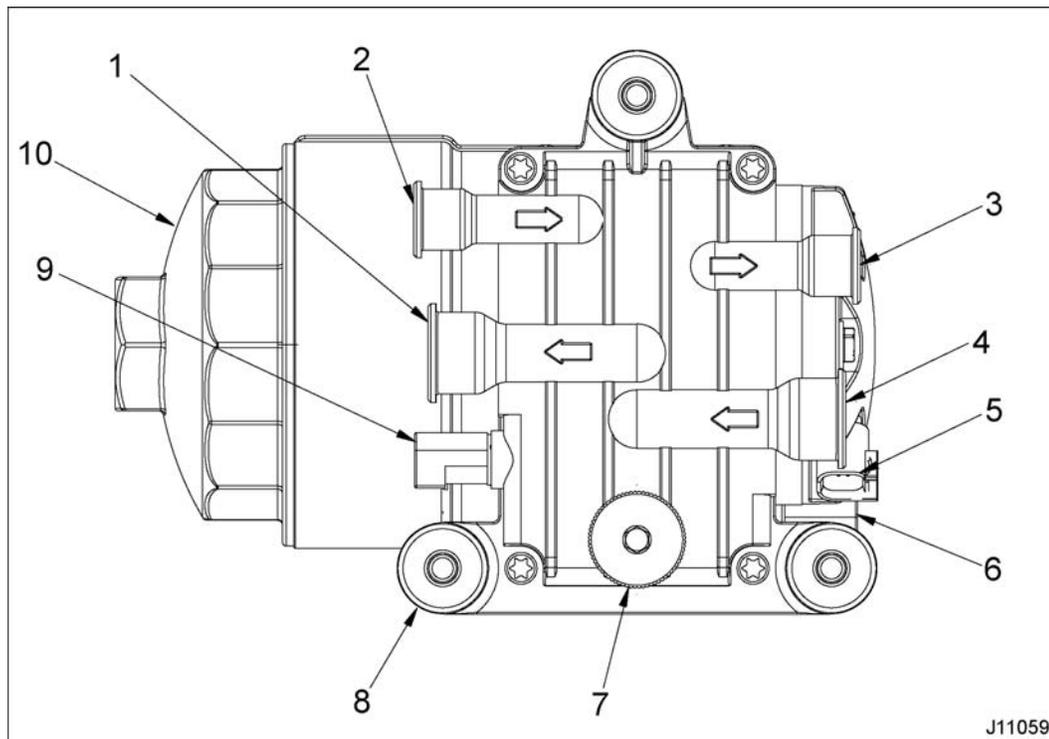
Horizontal Fuel Conditioning Module (HFCM) (chassis mounted)
